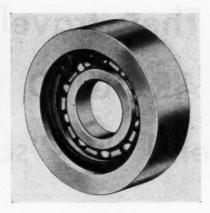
"Truarc" Internal Retaining Ring Used to Form Ballbearing Shoulder in Housing
